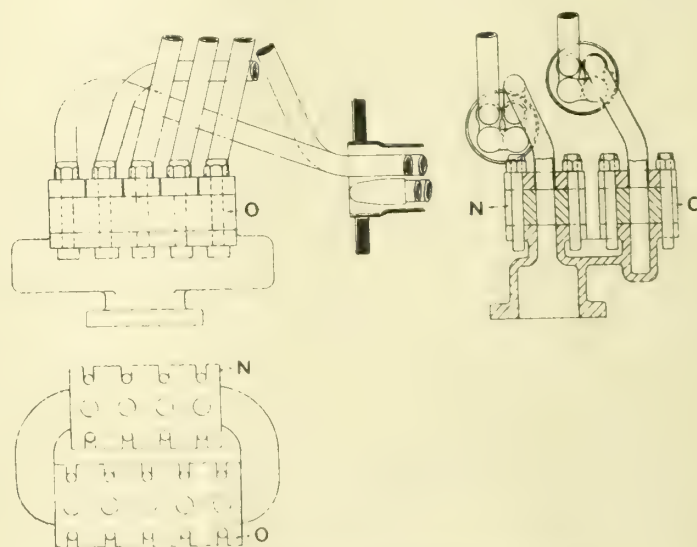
HUGHES' SUPERHEATER FOR LOCOMOTIVE BOILERS.
